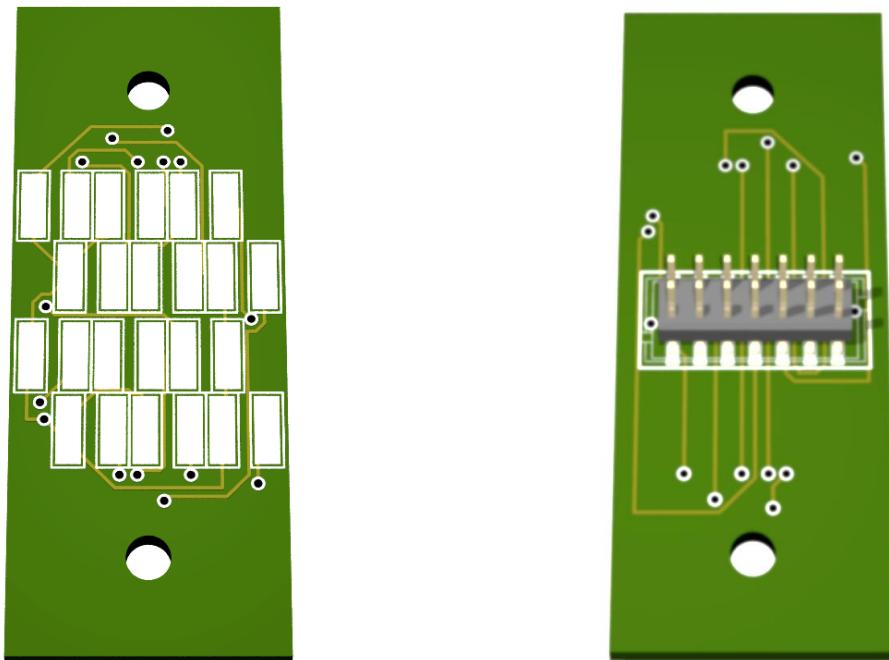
Animation of upper (left) and bottom (right) side of the braille module PCB.
